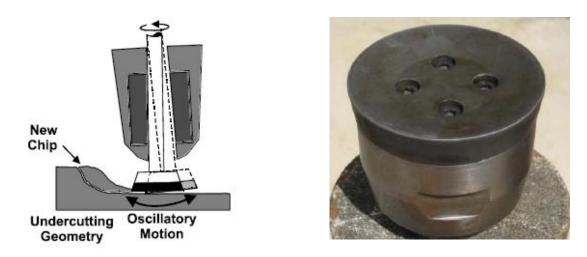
Principle and example of a cutting tool of the Oscillating Disc Cutting method [3]
